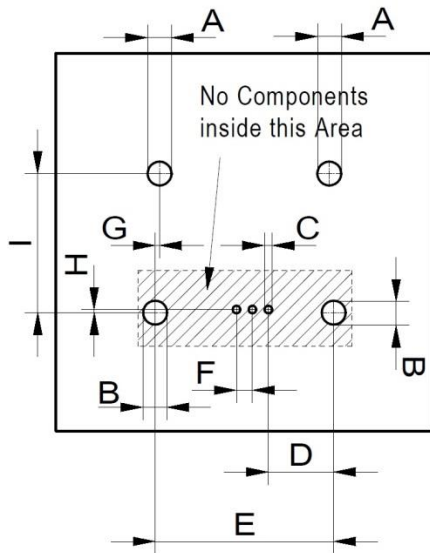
Pin out and physical dimensions in mm (inch). The drawing is not to scale
